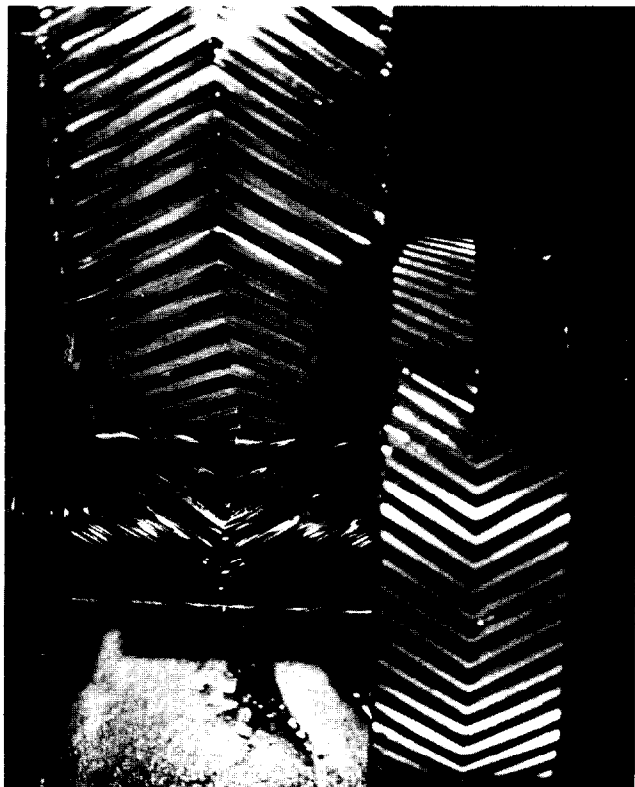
A.P.I. Size 228 Gear Reducer With Nodular Iron Gears
